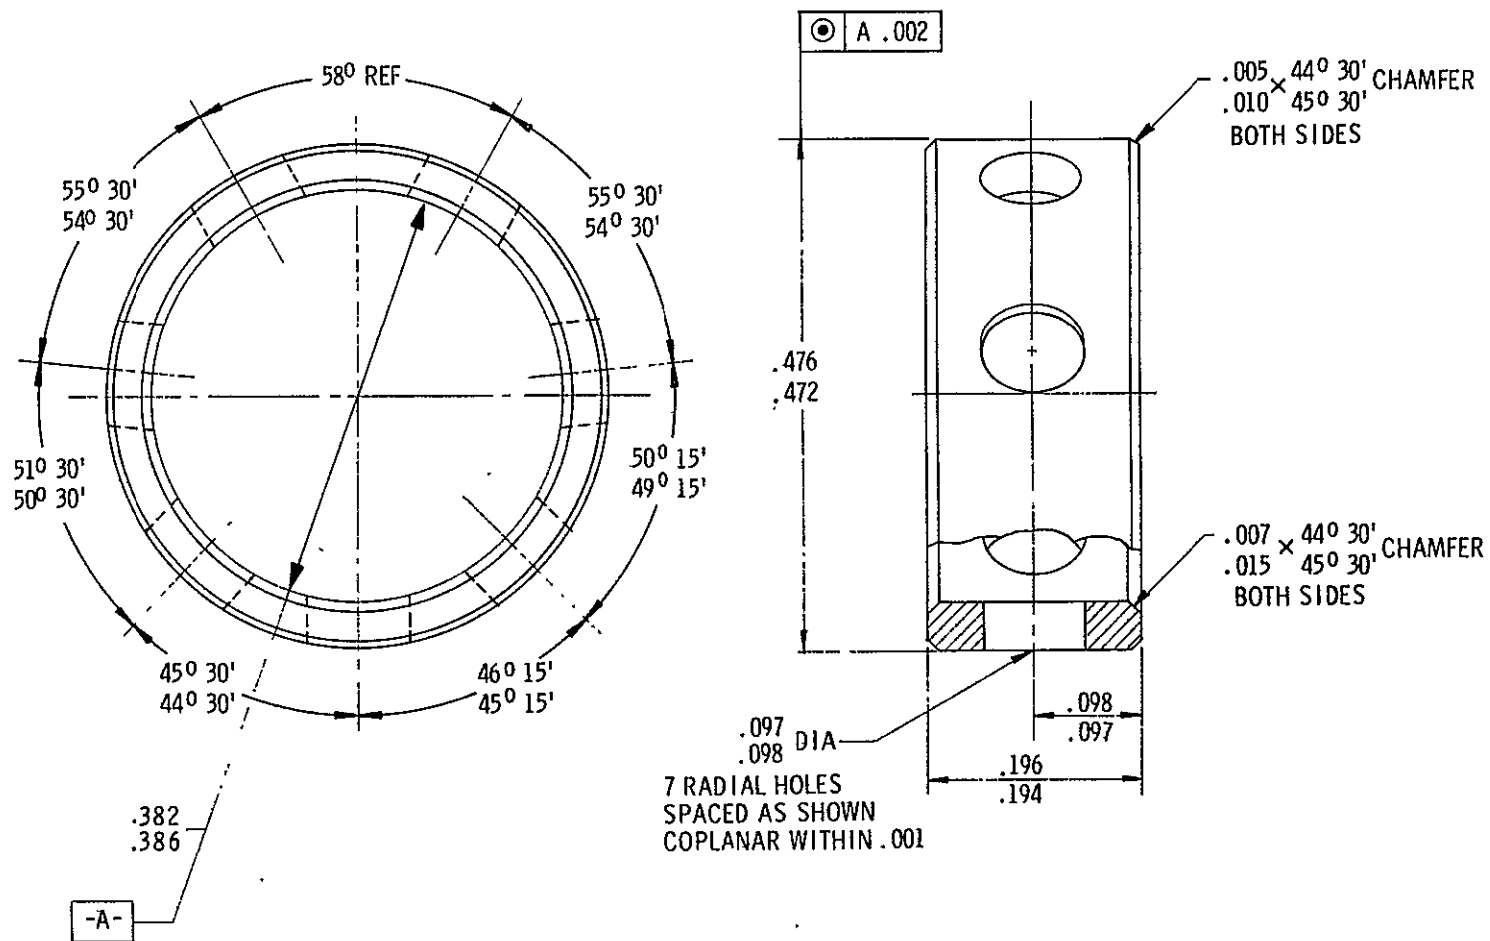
SR4HX88K/L bearing assembly drawing.
